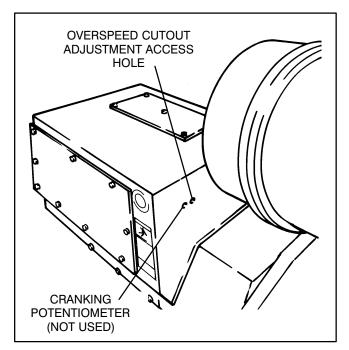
OVERSPEED CUTOUT ADJUSTMENT ACCESS HOLE
